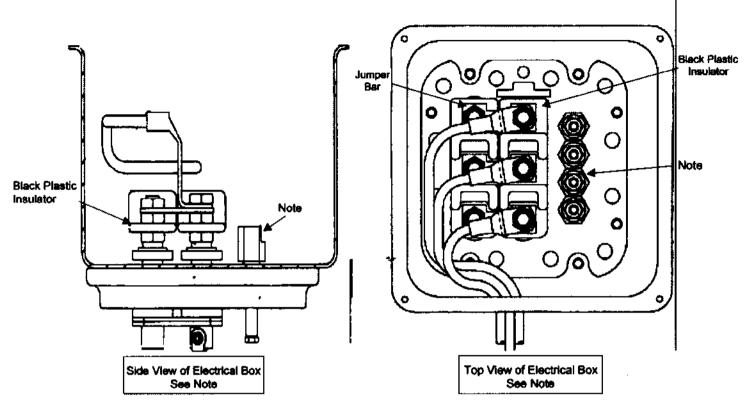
06E, 06CC & 06T TERMINAL BOX & WIRING
